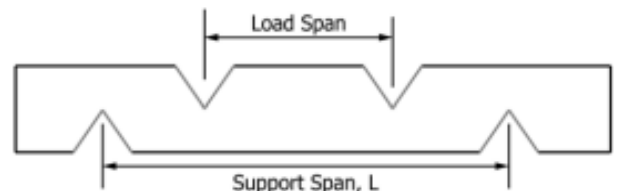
Fixture Used to Align Loading Noses and Supports
